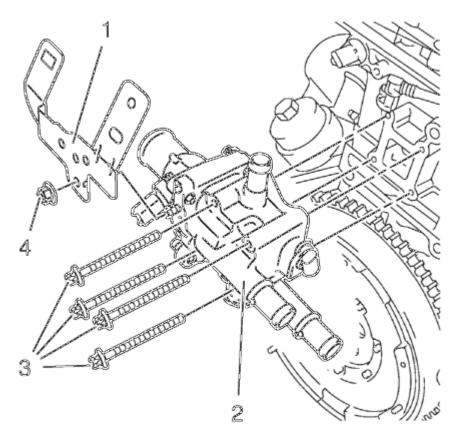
Engine Coolant Thermostat Housing Courtesy of GENERAL MOTORS COMPANY
